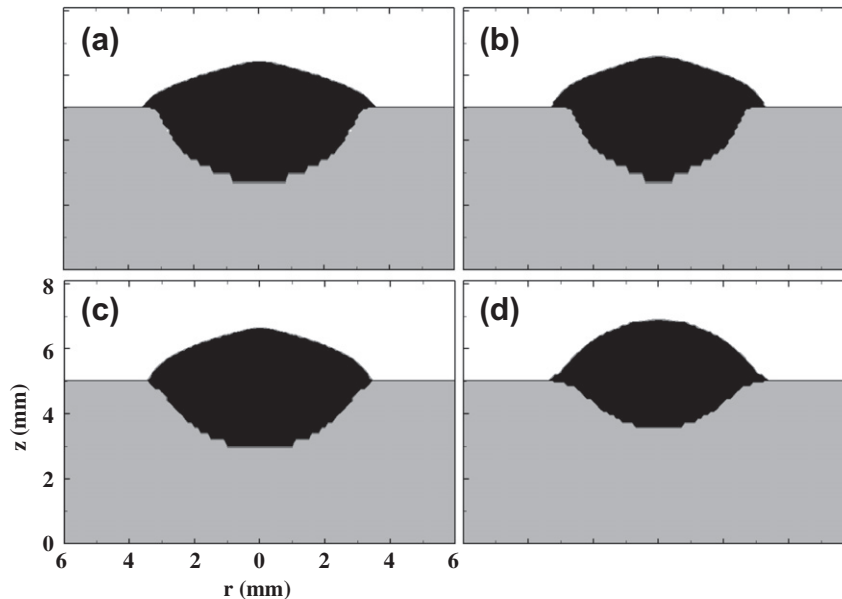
The solidified weld bead shapes: (a) pure Ar, (b) 75% Ar, (c) 50% Ar and (d) 25% Ar.
